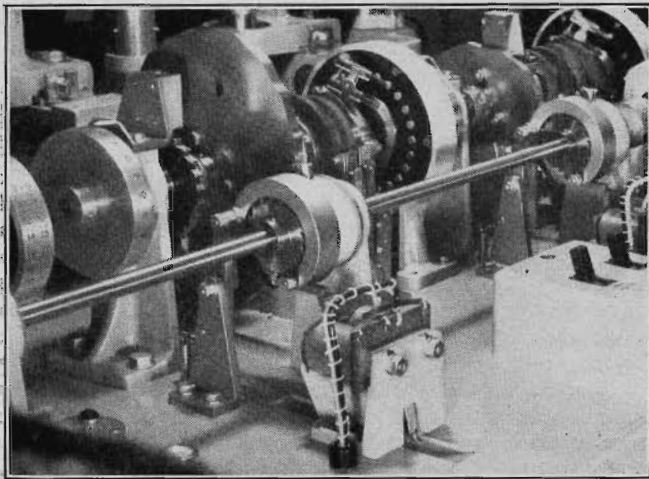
HOURS AND SECONDS CARRIAGE-SHIFT MECHANISM.
